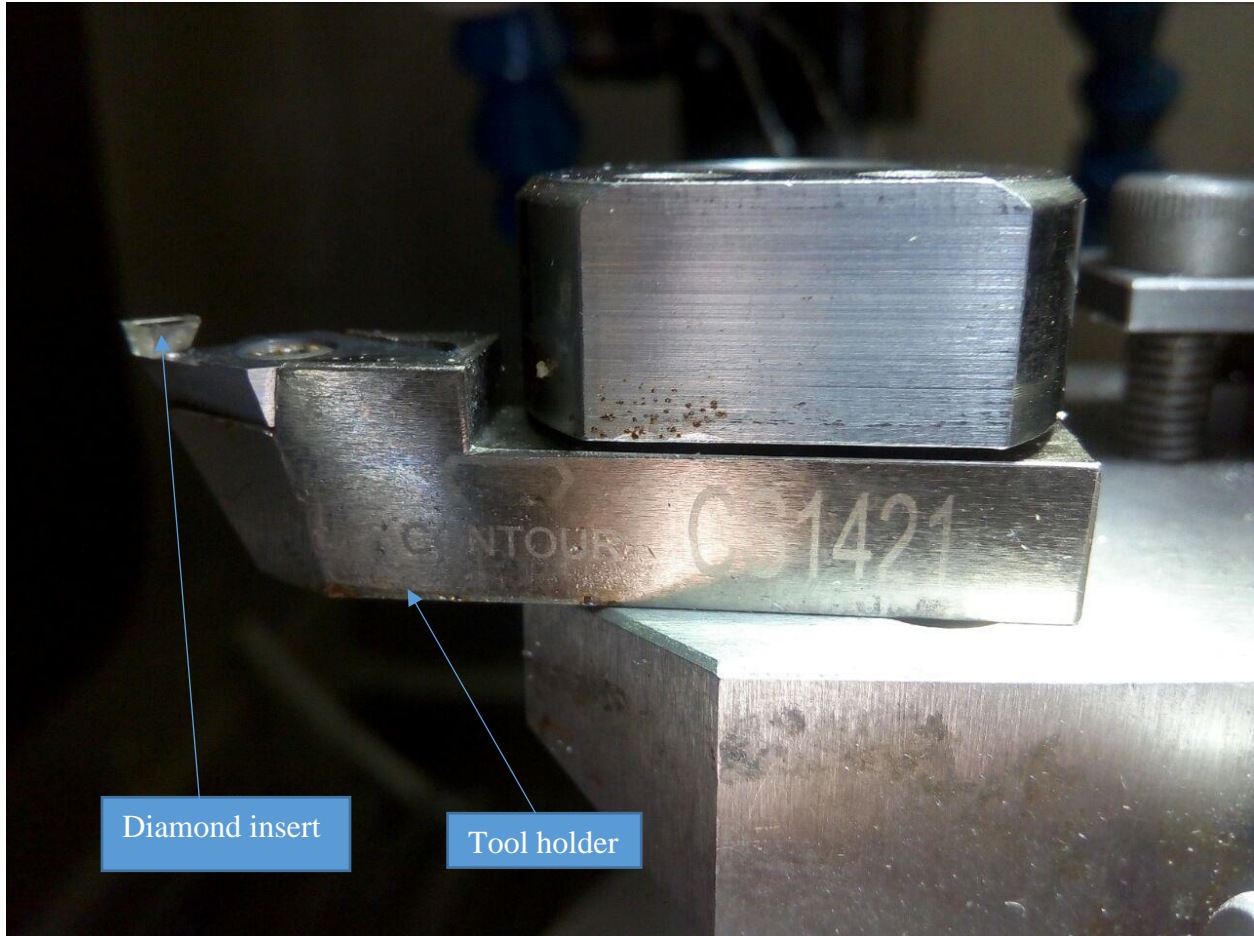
Mono-crystalline diamond tool mounted on a tool holder for ONSI-56 Machining
